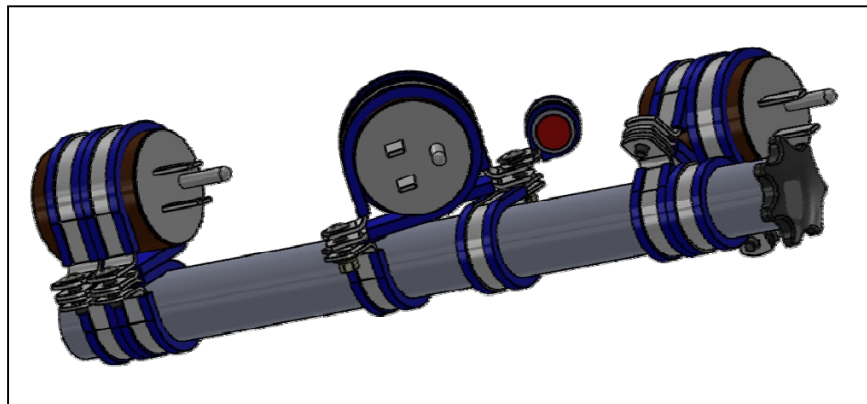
Examples of shore power plug and indicator light mounted using clamps.
